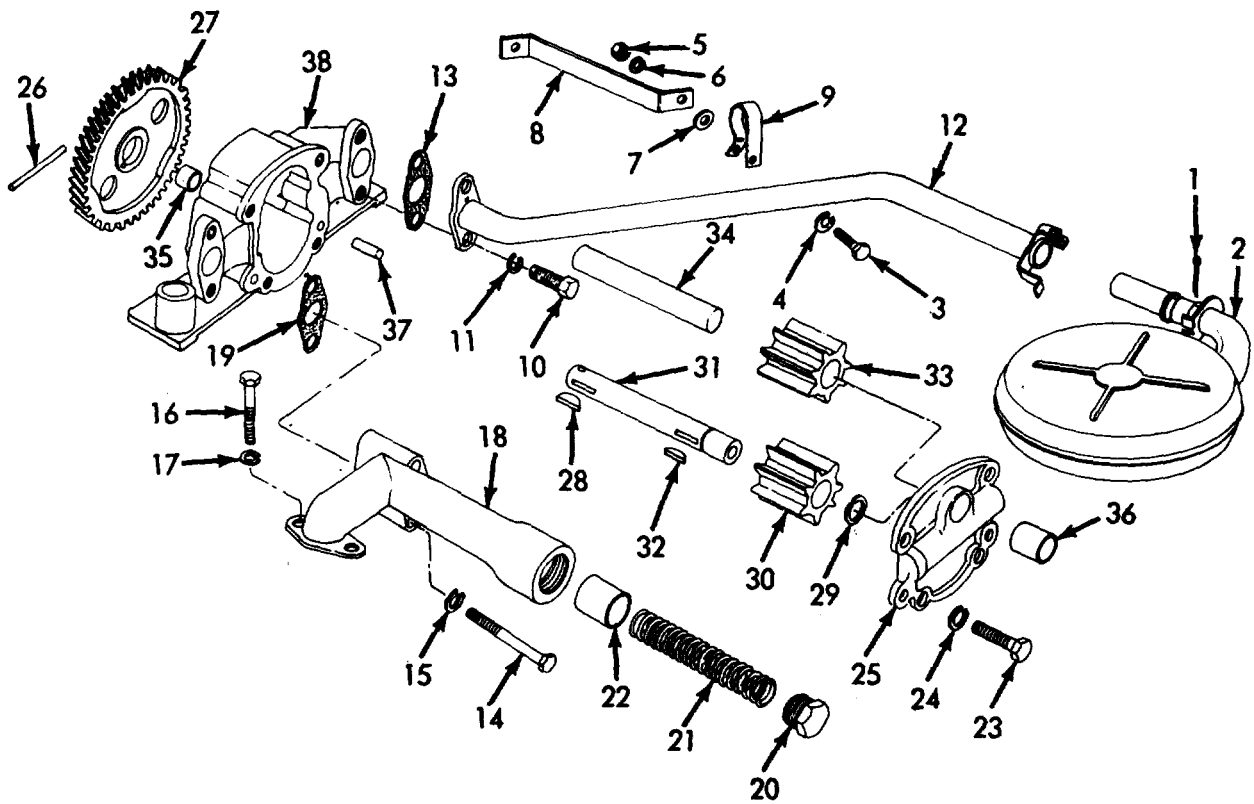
Plow and carrier engine lower oil pan, oil pump, pickup screen, and upper oil pan assemblies, removal and installation.
